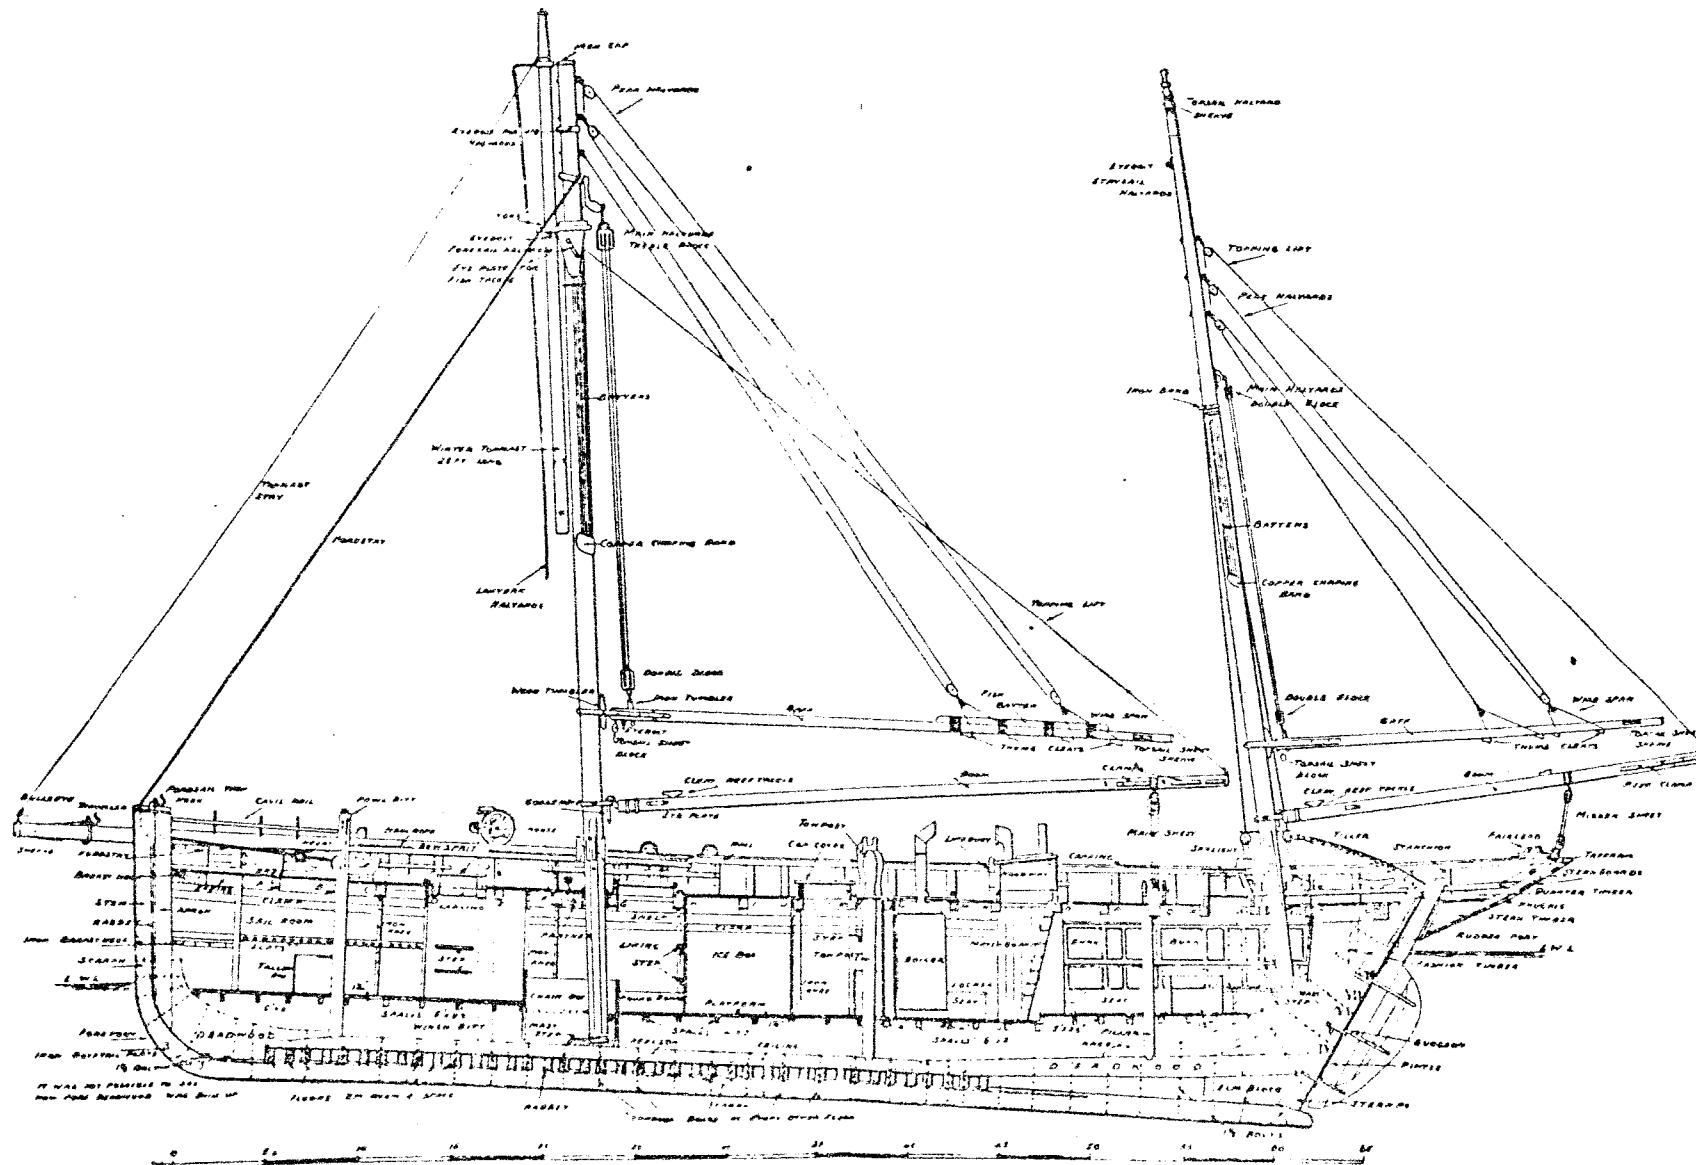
Construction plan of the same trawler showing details of spars and running rigging
